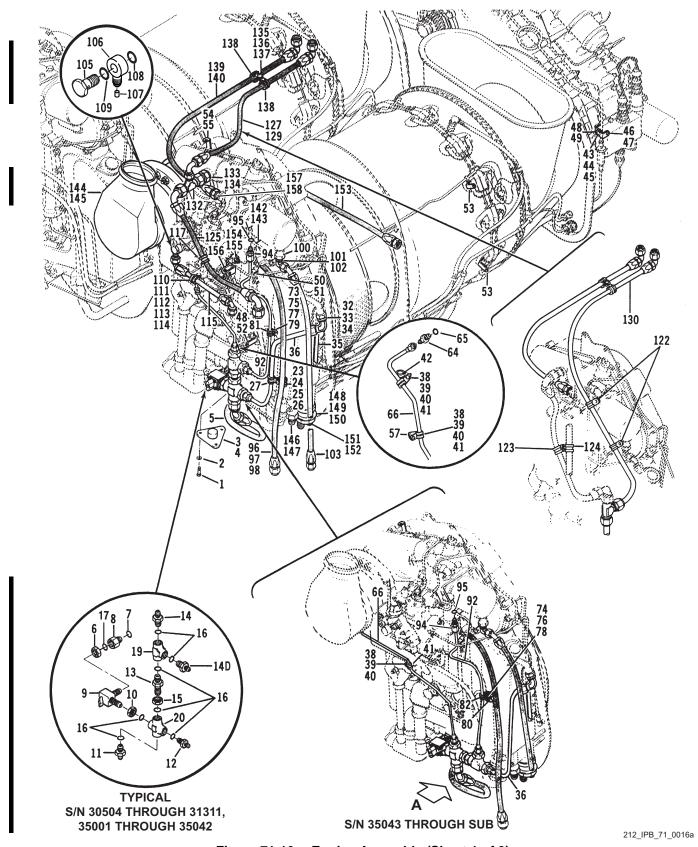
Engine Assembly (Sheet 1 of 3)
